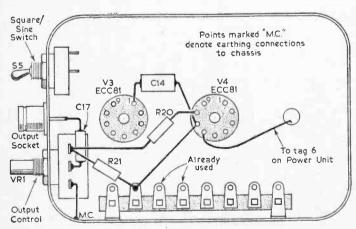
The wiring of the cathode follower stage—only wiring additional to Fig. 17 is shown.
